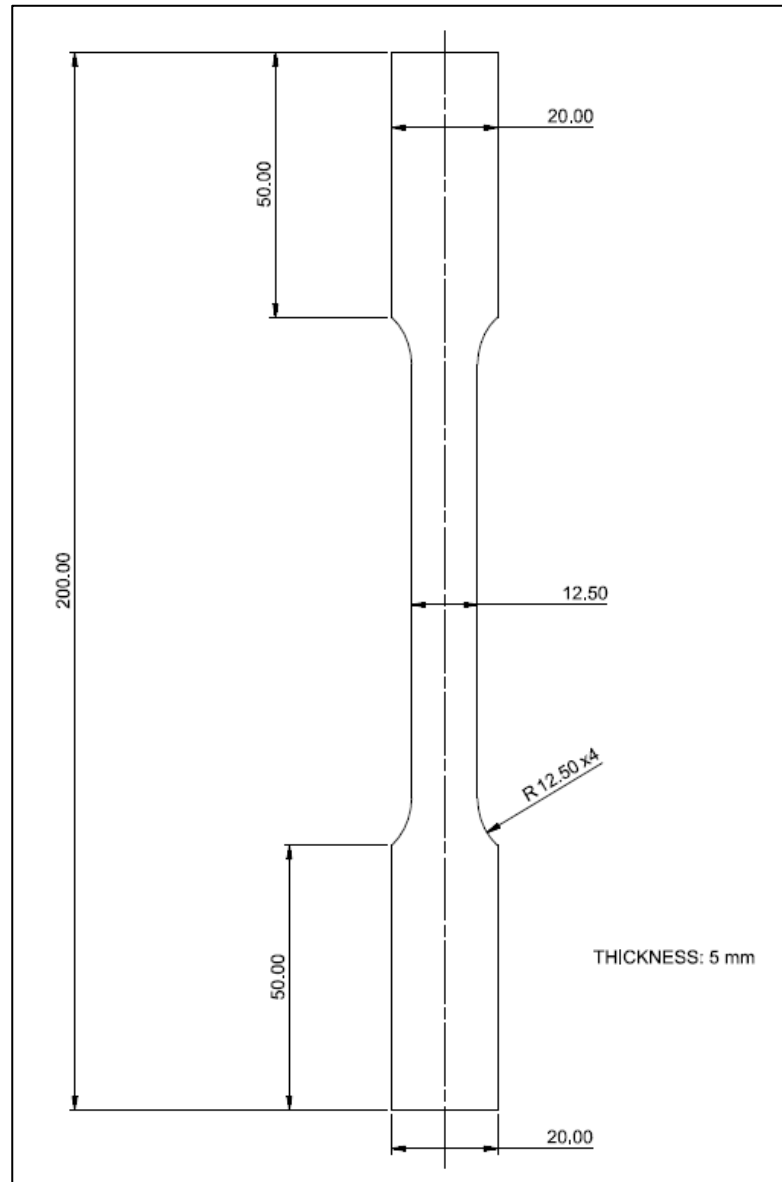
2-D drawing of the aluminum tensile strength test specimens, [mm]
